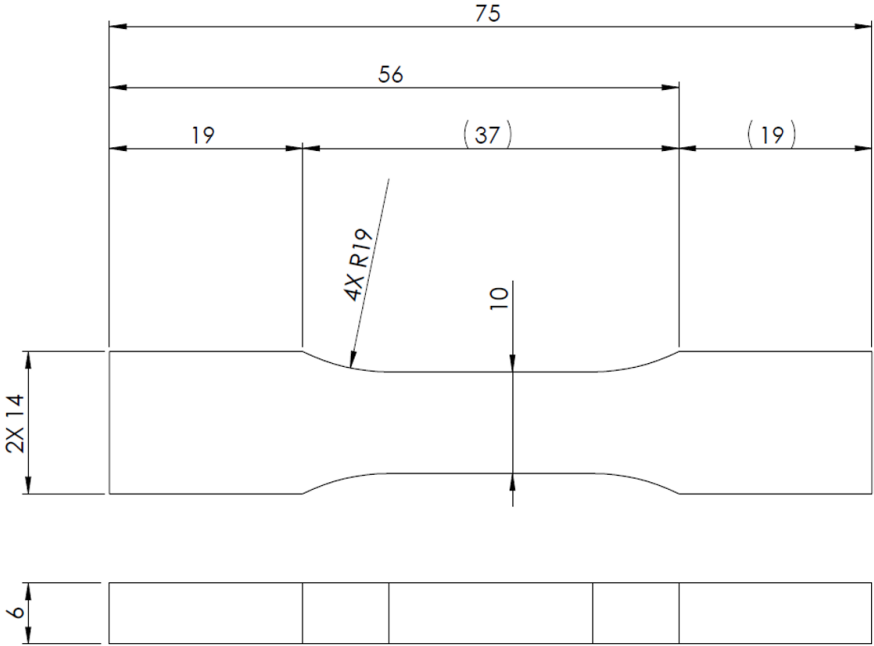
Fatigue specimen geometry. Dimensions in mm. Made by author.
